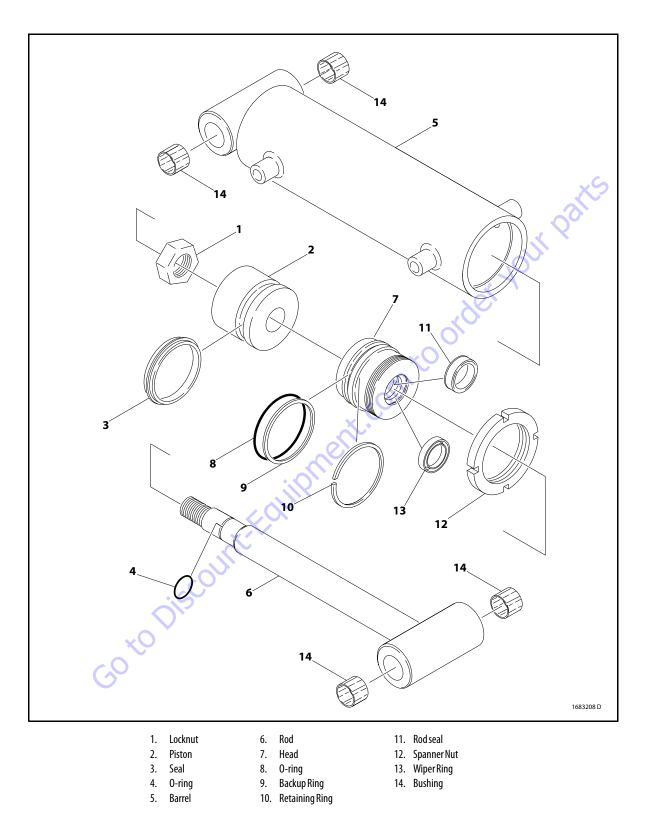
Steer Cylinder USA Built Machines, SN 0300087000 through 0300142634)
